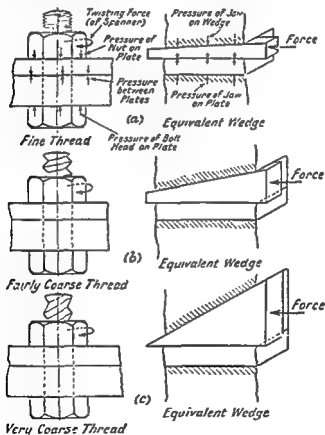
Diagram to show a Screw Thread and its Equivalent Wedge clamping a Plate.
